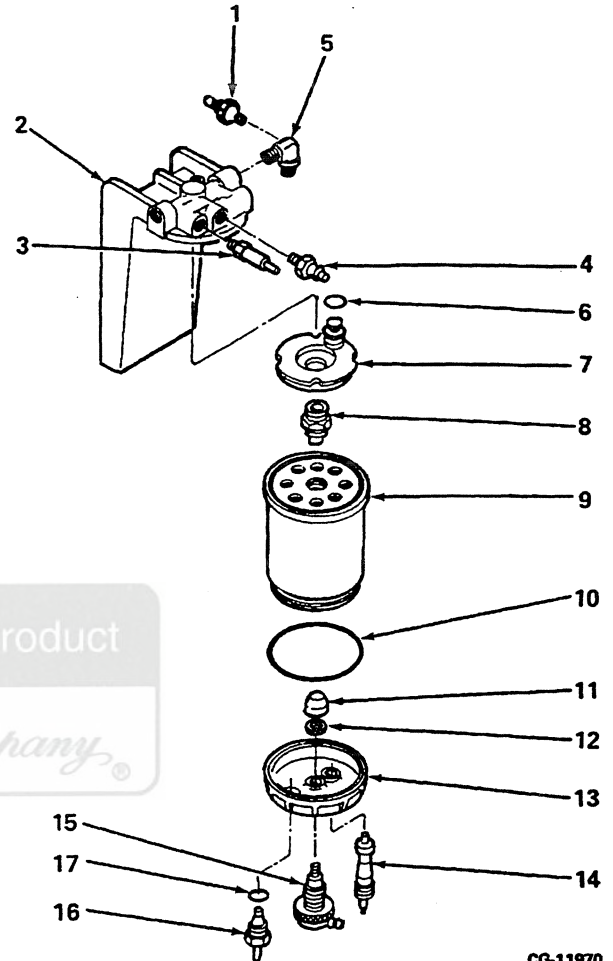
A. Fuel Filter, Fuel Heater and Water Separator Assembly
